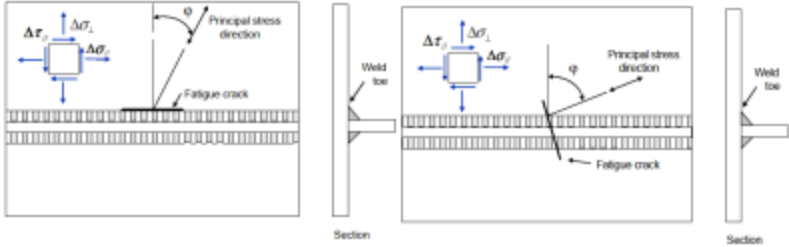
Fatigue cracking along weld toe (left), principal stress direction more parallel with weld toe (right) [1]
